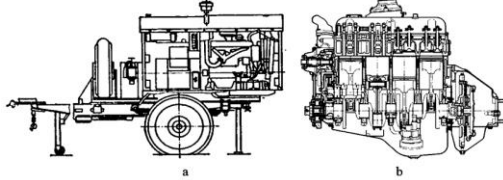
General view of the electric welding unit (a) and its motor (b).
